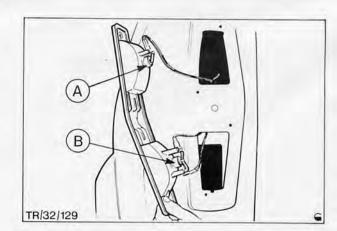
Rear lamp wiring A – Indicator B – Stop/tail lamp
